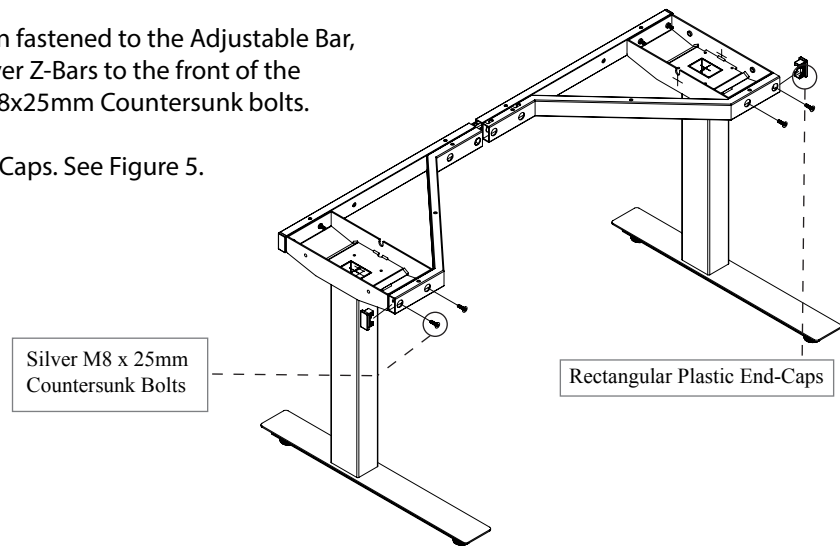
Attach Kneesaver Z-Bars to front of Motor Housings
